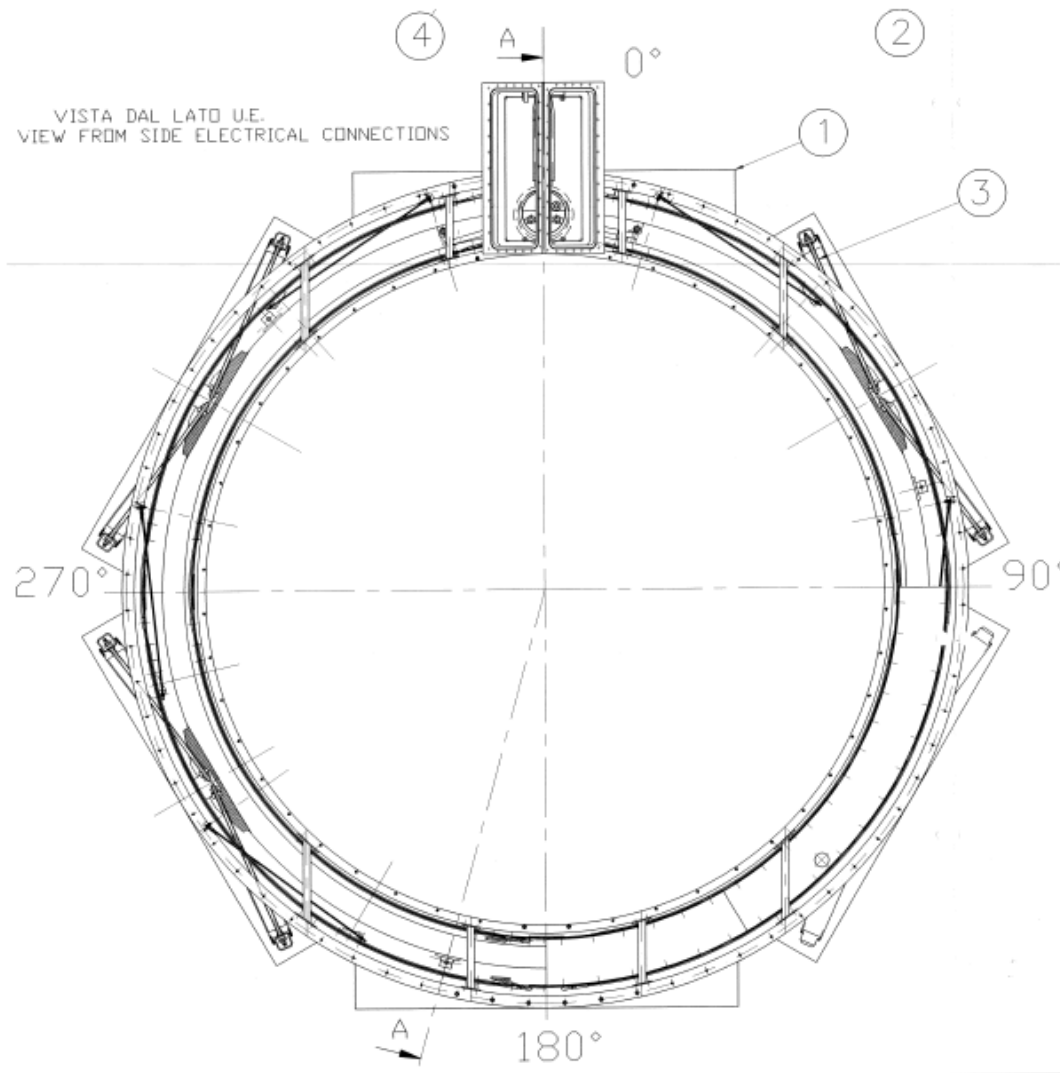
Original Ansaldo drawing: Cryostat Assembly
